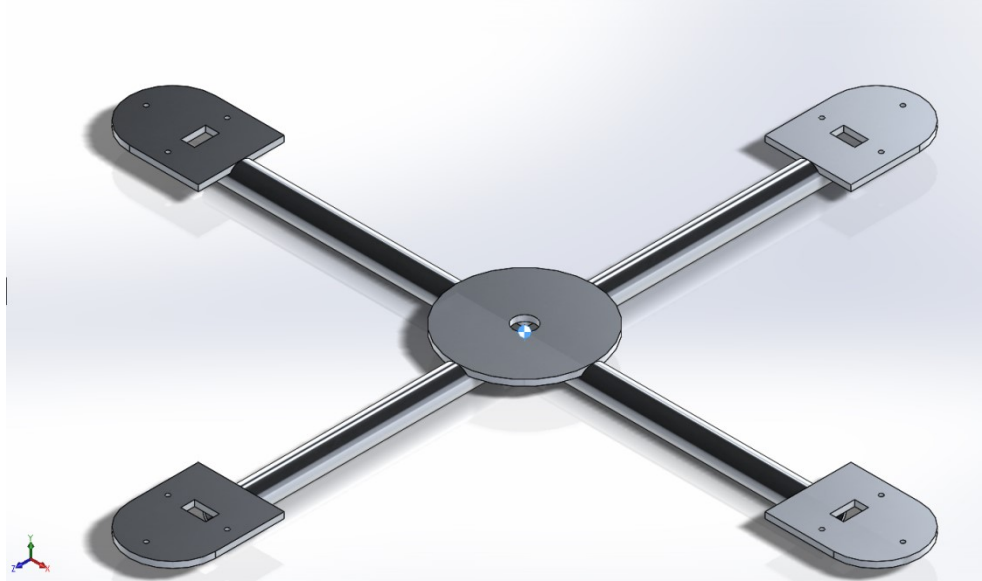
Aluminum 6061 Alloy Weld Design.
